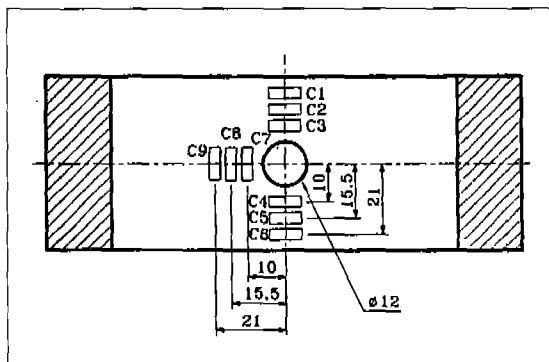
The Dimension of Specimen and bonded Location of Gauge
